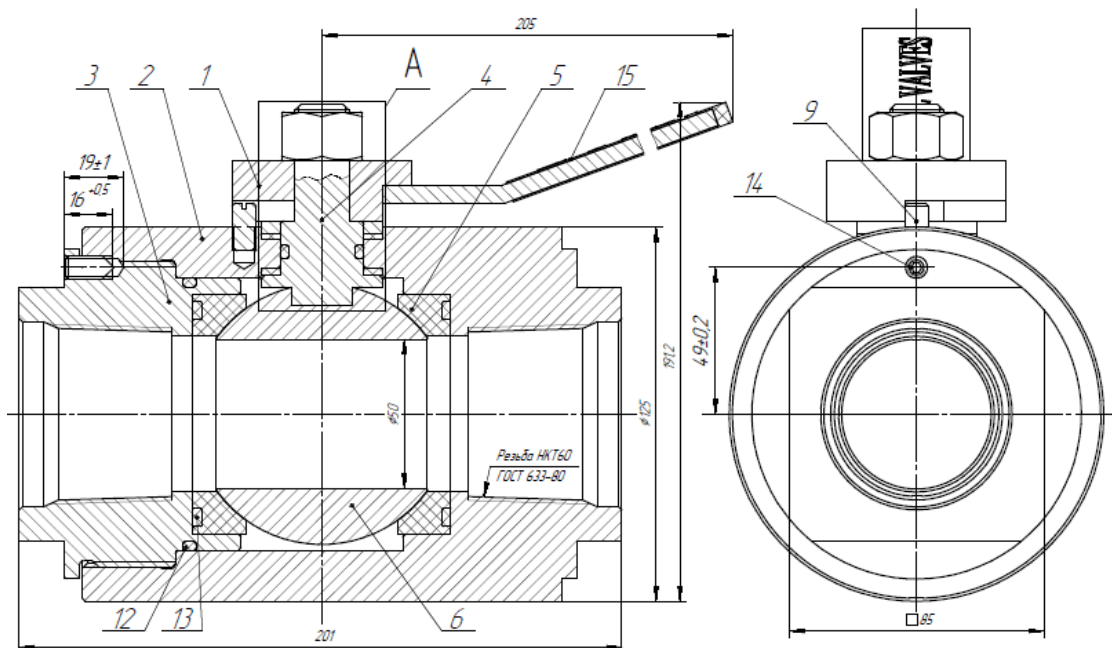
Design of a ball valve manufactured by JSC «Ust-Kamenogorsk Industrial Fittings Plant»
